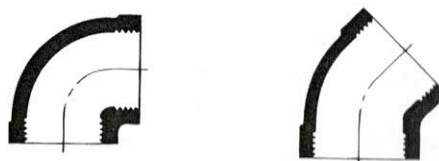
Standard threaded elbows: 90° (left), 45° (right). (courtesy of Crane Valve Co.)
